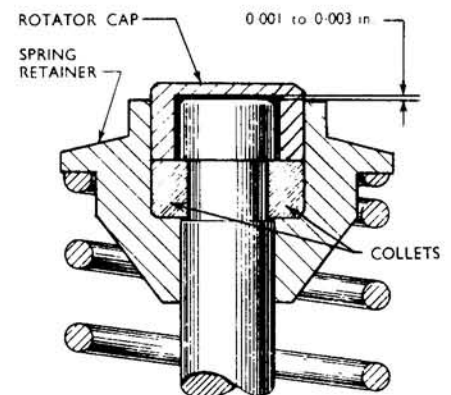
Cross-sectional view of late type exhaust valve spring retainer, rotator cap and collets. Note square lower shoulder in valve stem versus tapered lower shoulder of valve stem groove in Fig. 23. Clearance between valve stem and rotator cap should be 0.001-0.003.
